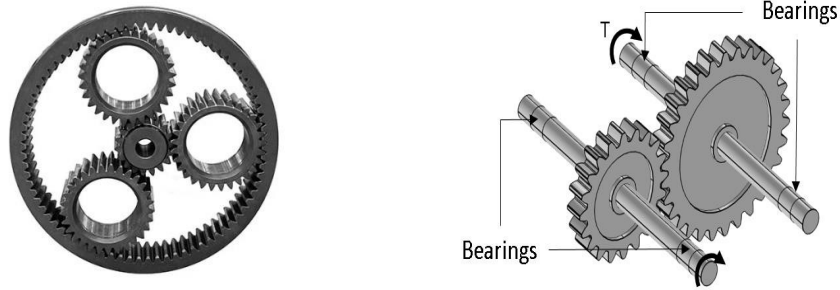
(a) Planetary Gear (b) Single Stage Gear.
